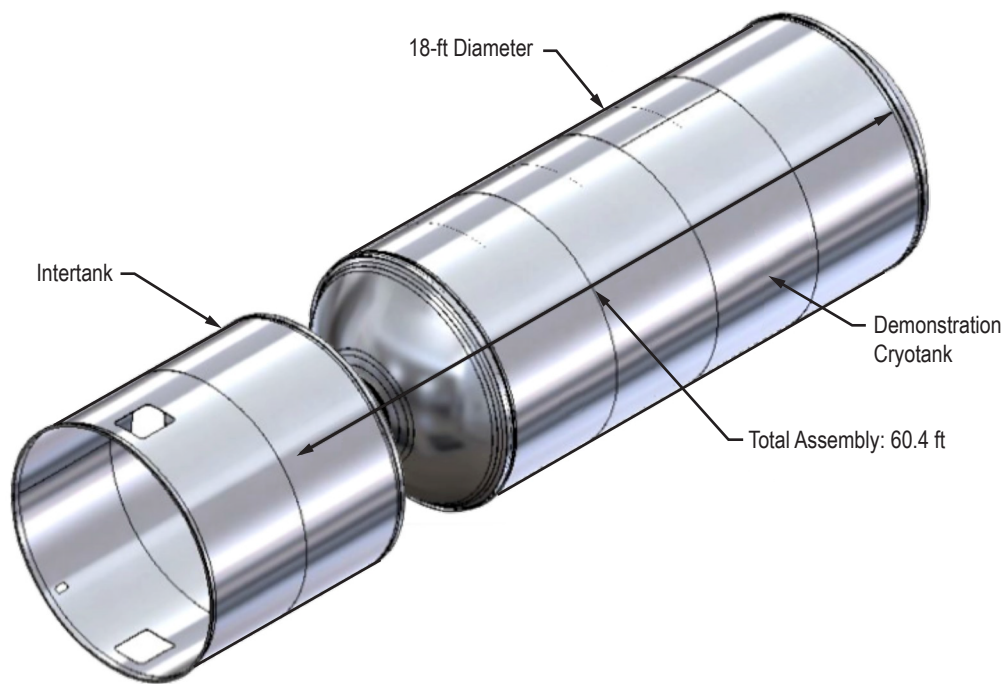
Dynetics ABEDRR cryotank/intertank assembly.
